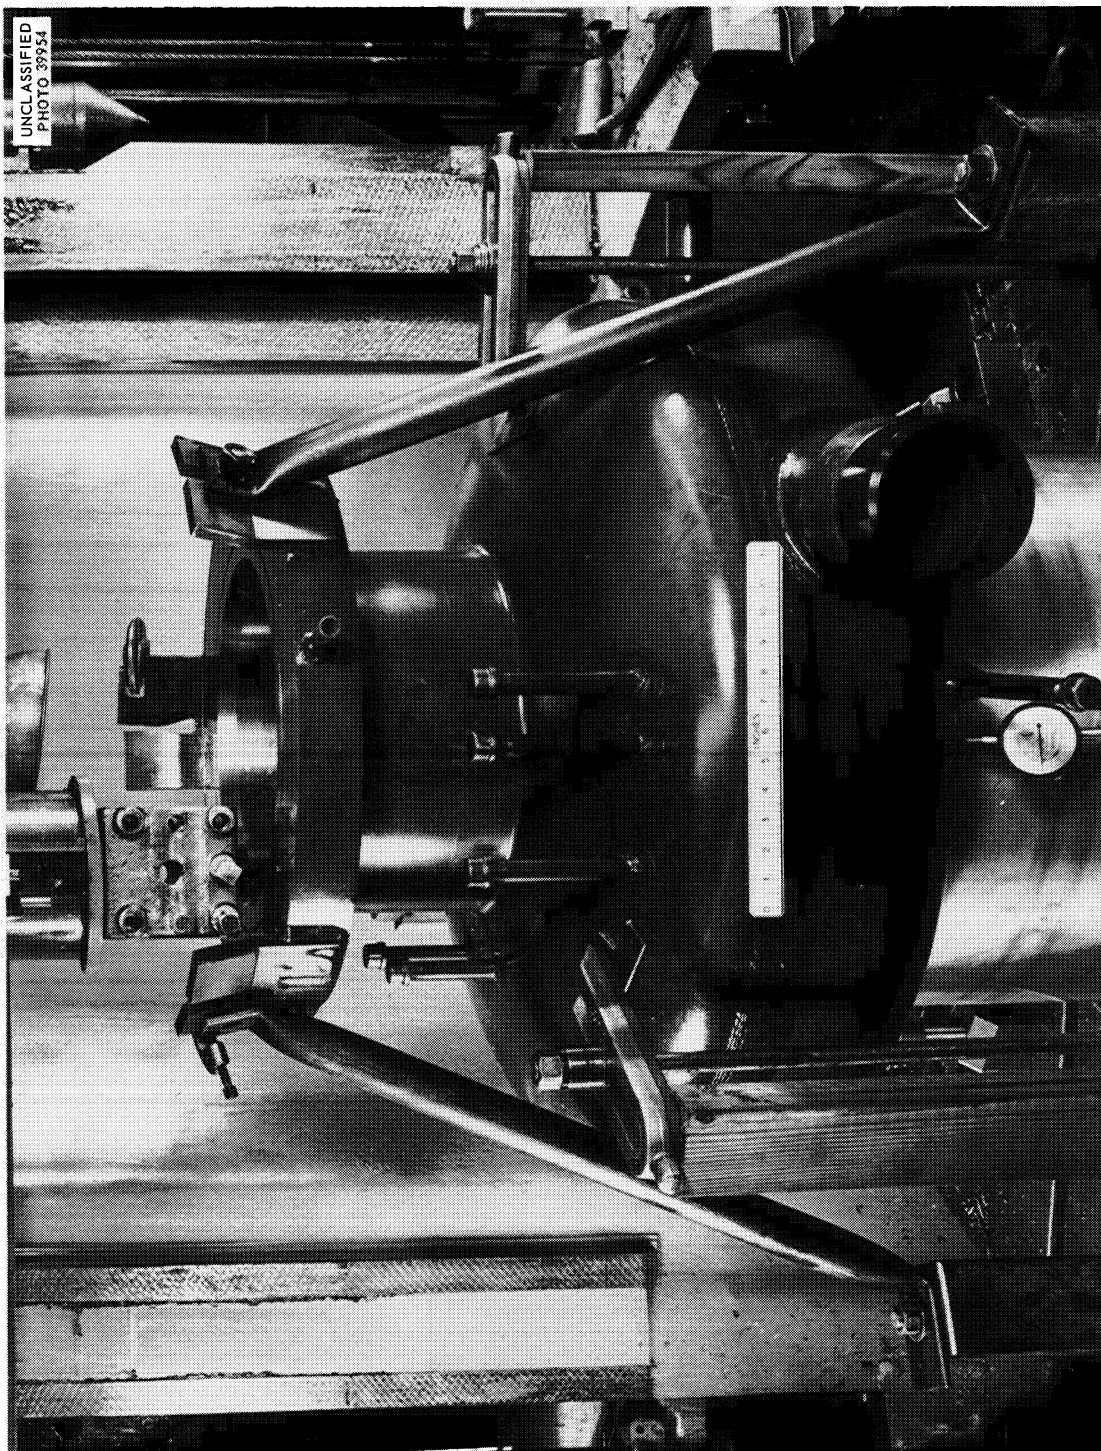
MSRE Coolant Pump Bowl After Final Machining.
